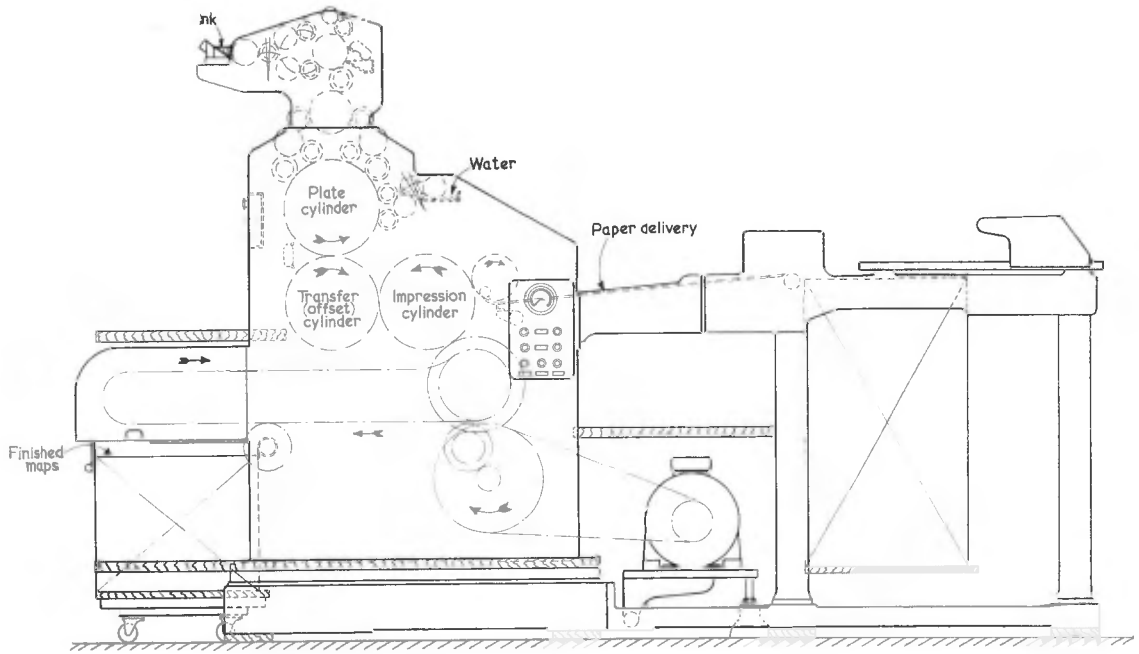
DIAGRAMMATIC SECTION OF A ROTARY OFFSET MACHINE
